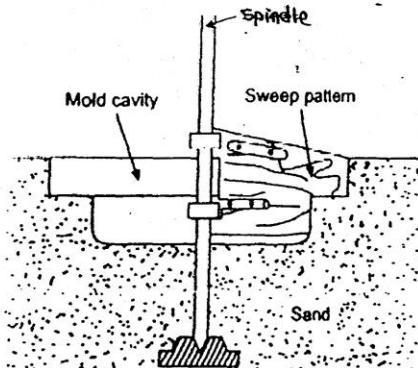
Fig. A sweep pattern and its use in making a mold cavity in the sand.
